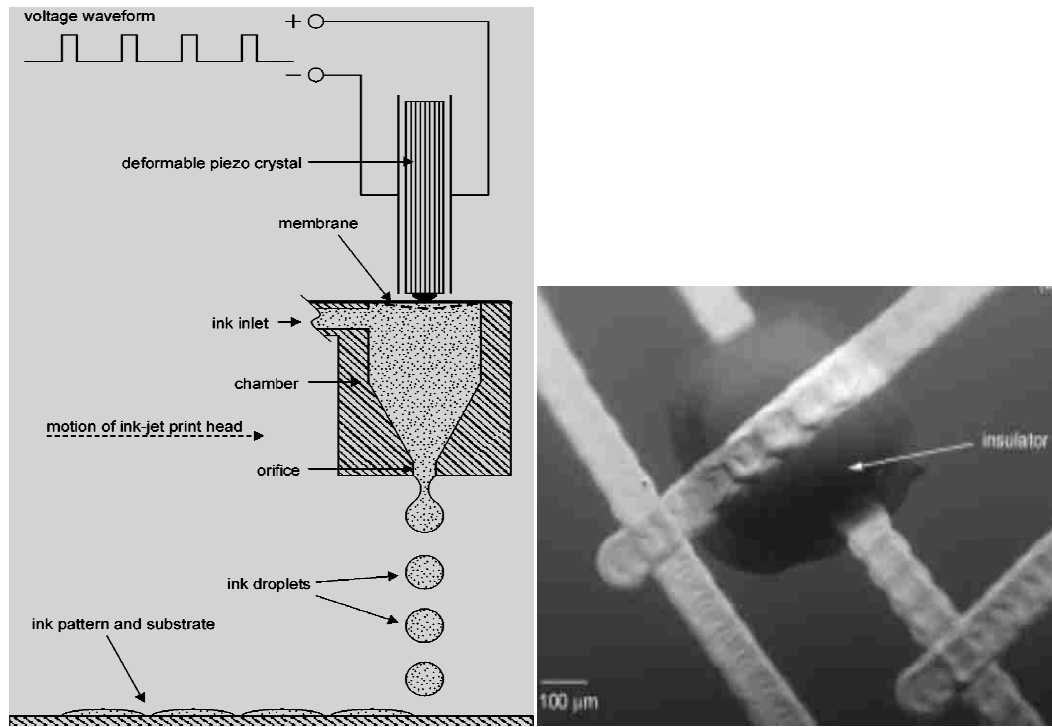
Schematic of the piezo inkjet printing system and optical image of printed electrode and insulator [Adapted from Ref. 6].
